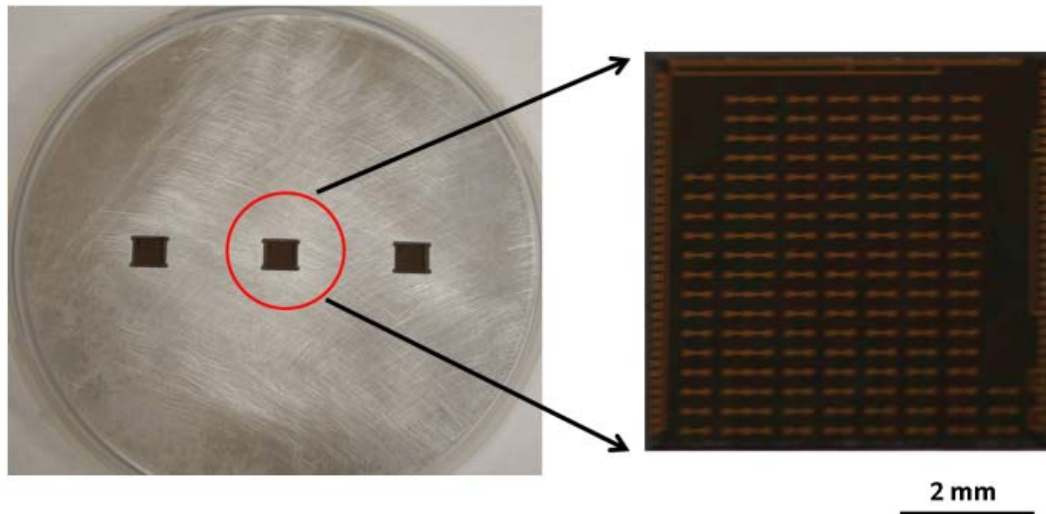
Custom holder for chip assembly technique; all lithography was done on this holder which also served as the safety buffer zone for squeegee.
